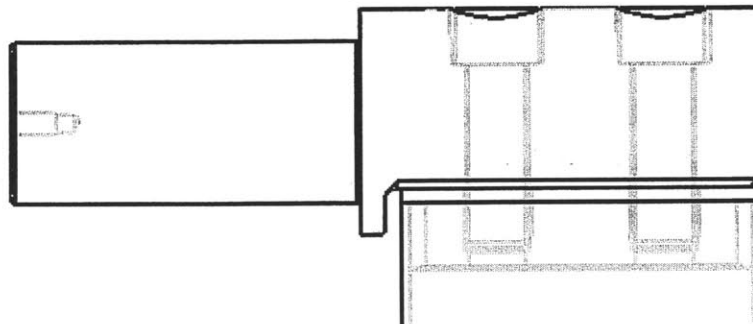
Starting design for  $L_1$ - $L_4$  joint shaft mounting.
